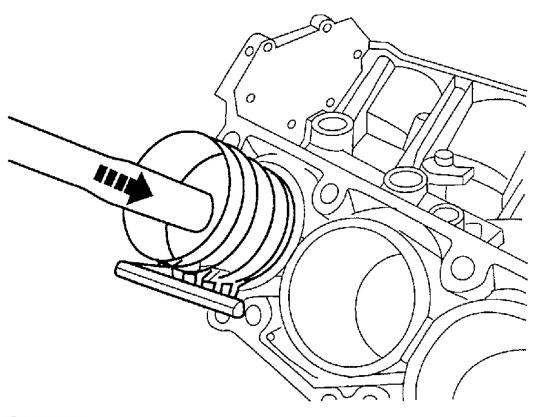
Loading Piston/Connecting Rod Assembly Into Ring Compressor Courtesy of DAIMLERCHRYSLER CORP.
